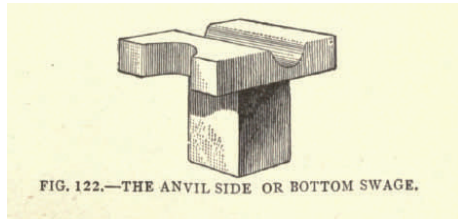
THE ANVIL SIDE OR BOTTOM SWAGE.
